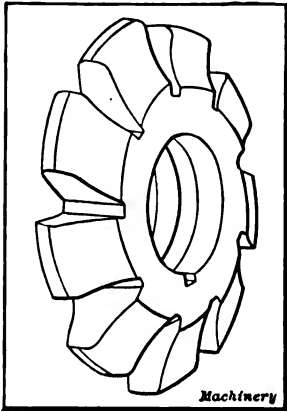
Cutter for Milling the Teeth of Spur Gears
